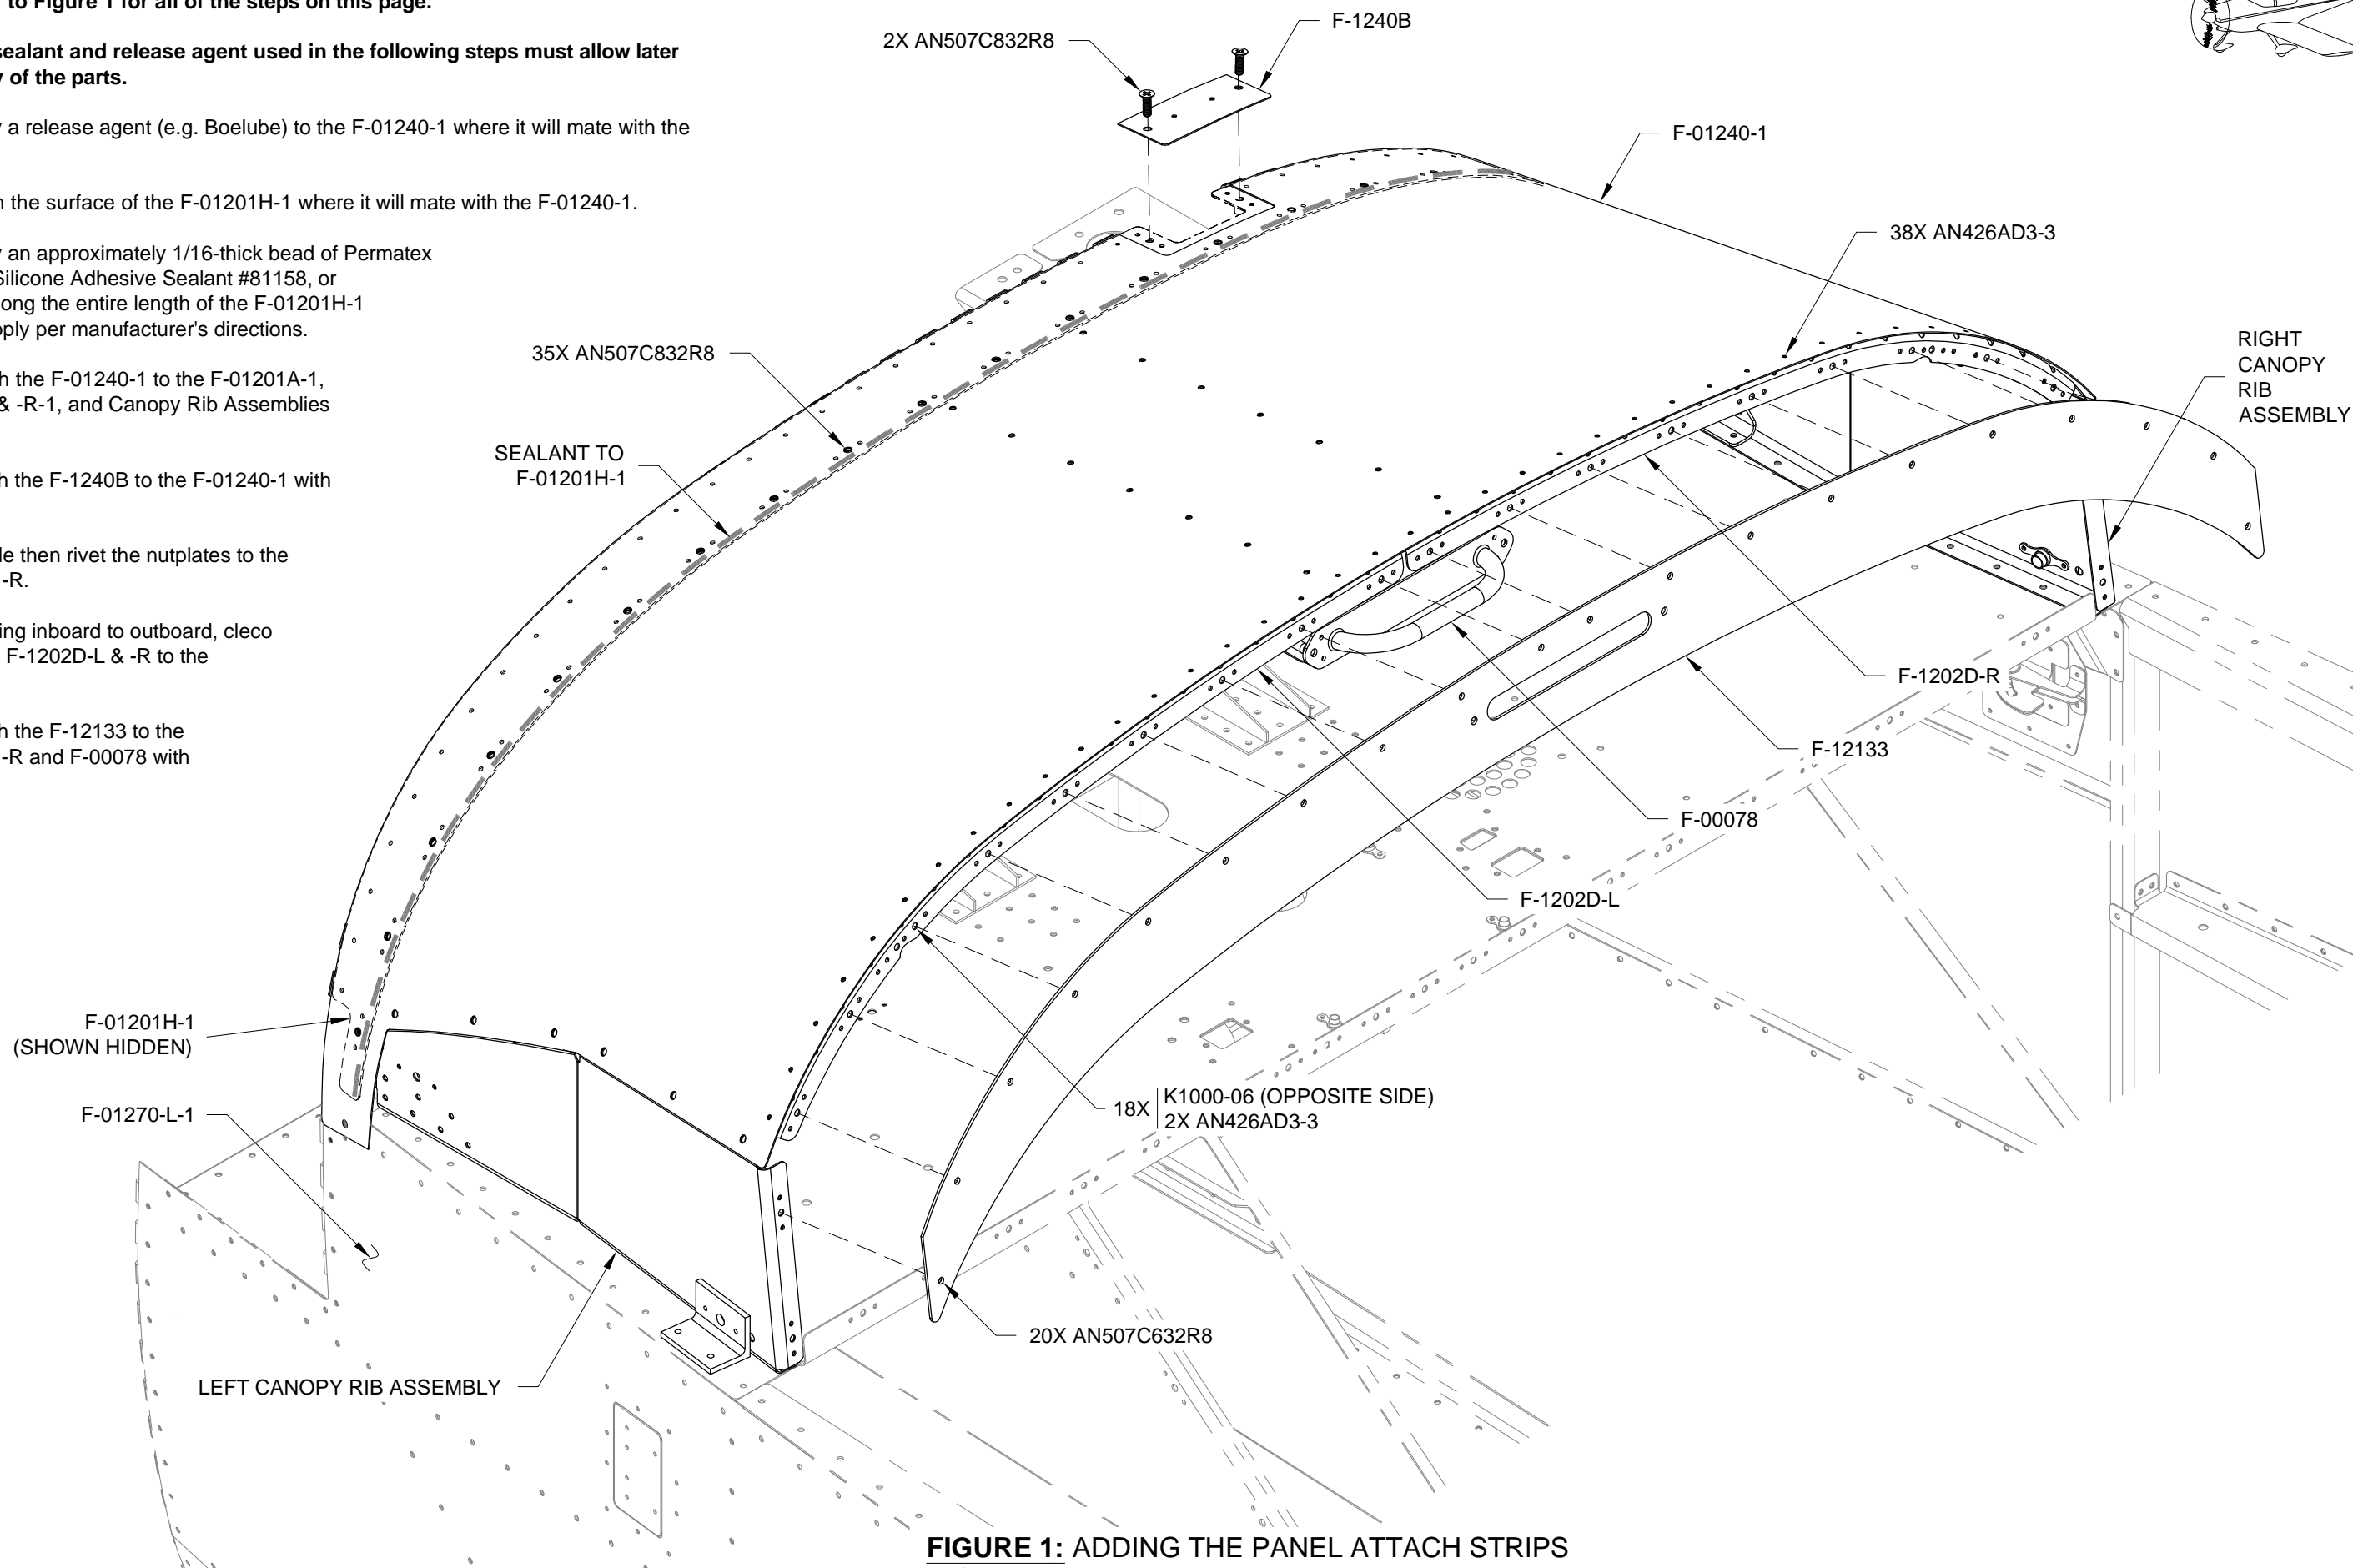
ADDING THE PANEL ATTACH STRIPS
